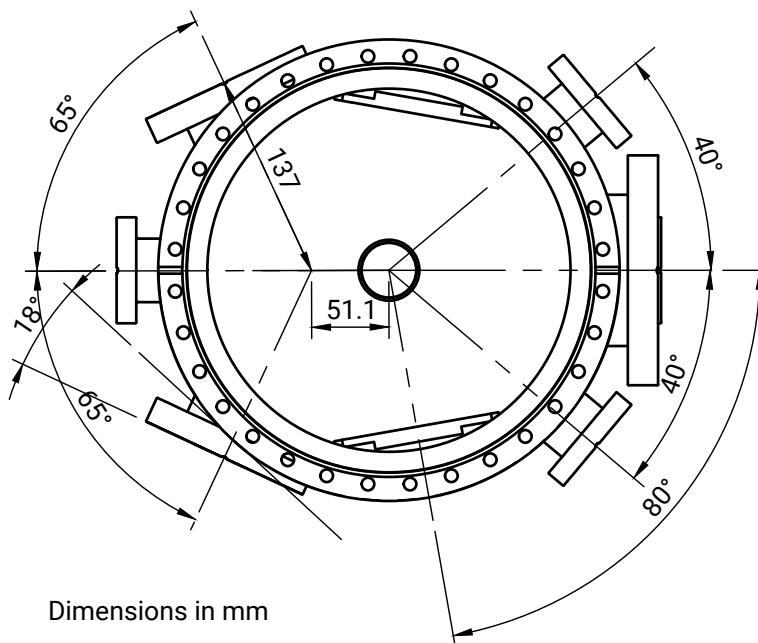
Technical drawing of the lower part of the aluminum vacuum chamber in top view.
